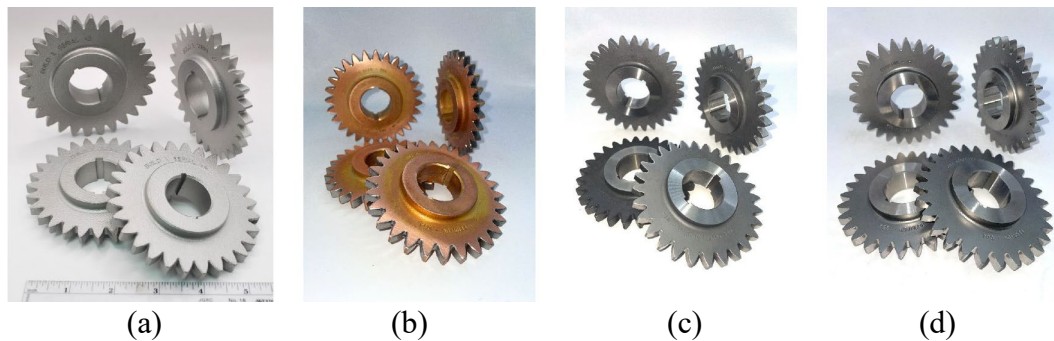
Images of Ferrium C64 steel gears through postprocessing steps: (a) after deposition and hot isostatic pressing, (b) after copper plating and initial machining, (c) after carburization and final machining, and (d) after shot peening.²⁴
